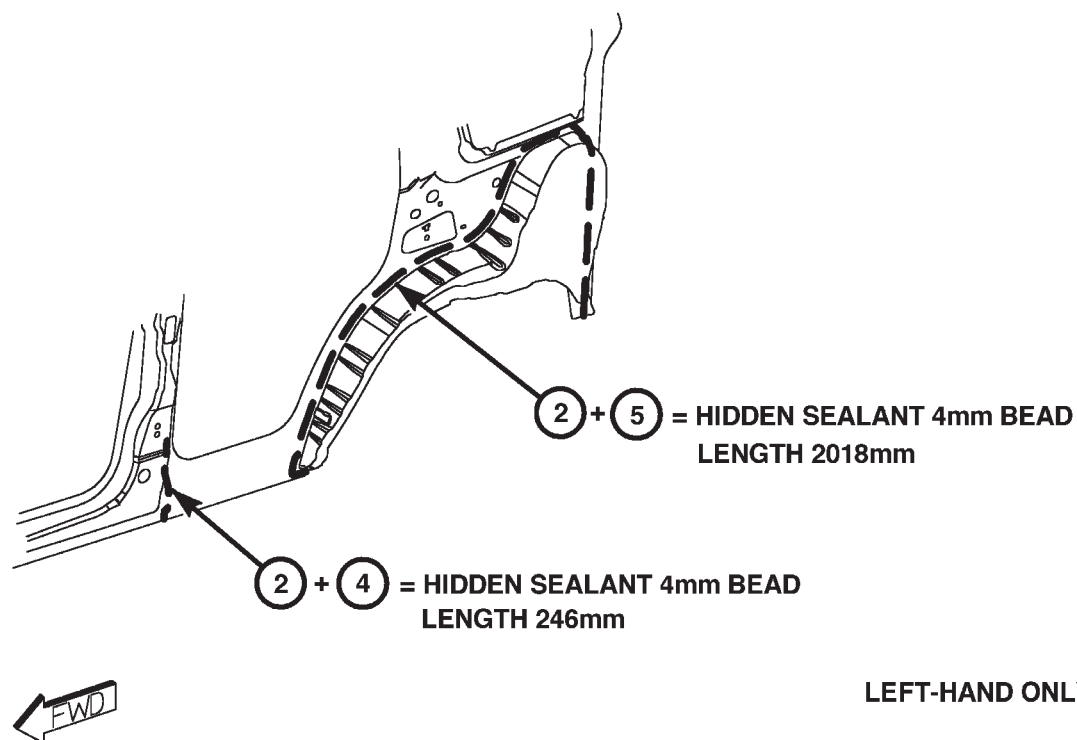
BODY SIDE PANEL ASSEMBLIES
